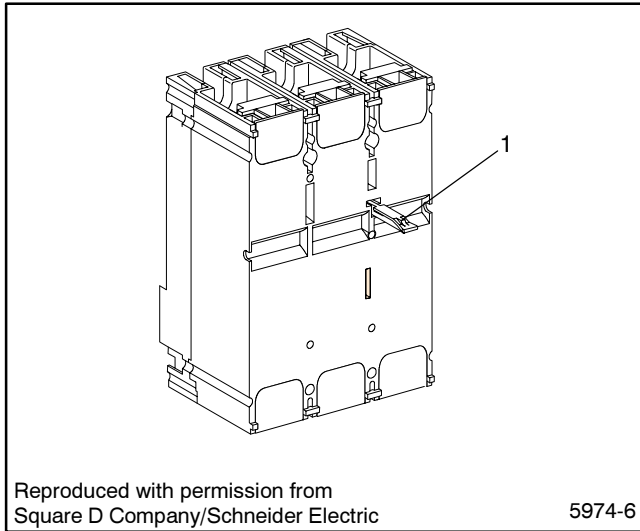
Circuit Breaker Mounting Screw Locations, 40–250 Amps
